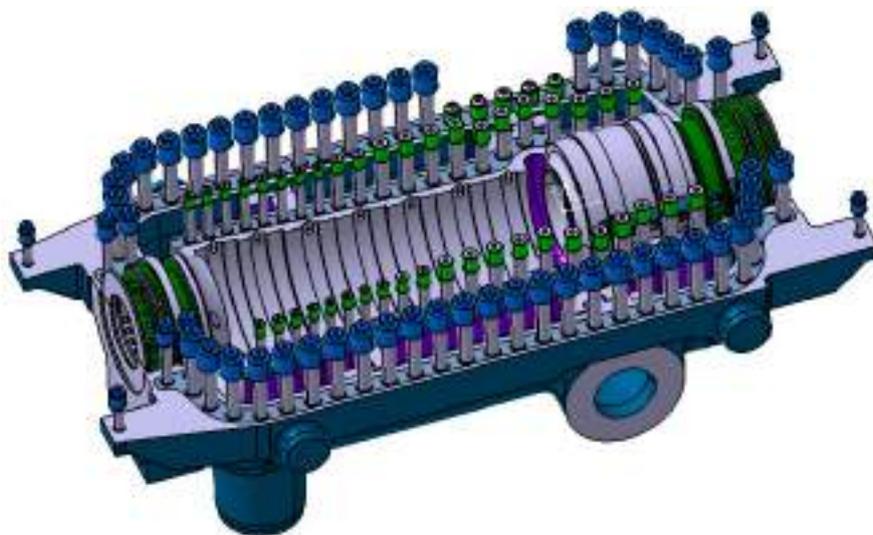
Typical Horizontal Stud Bolt Arrangement (for reference only)
